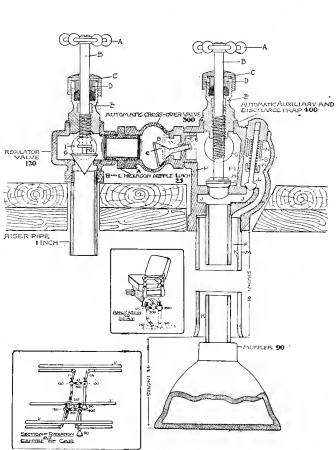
E. T. O. Coach Equipment. Parker Car Heating Company, Limited.
